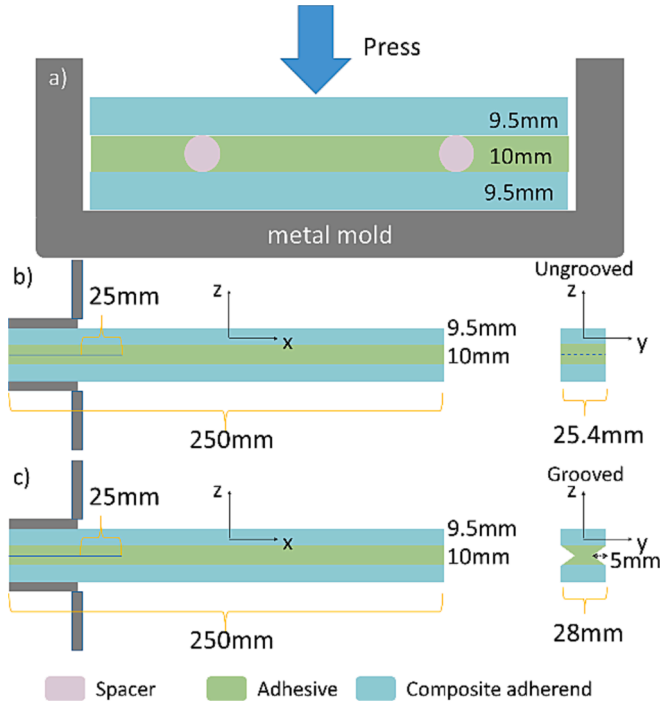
Illustration of the joint manufacturing method II by applying enough pressure to control the void content: a) joint manufacturing under press; b) ungrooved specimen; c) grooved specimen.
